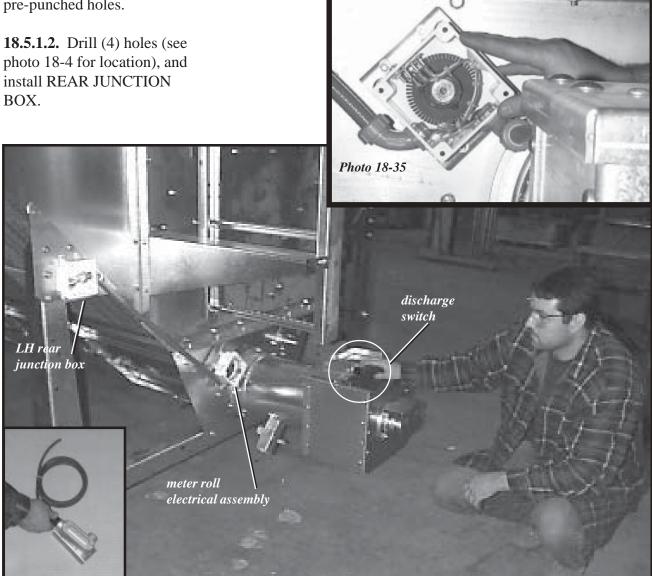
Meter roll wiring and discharge switch installed to C-Series dryer.
